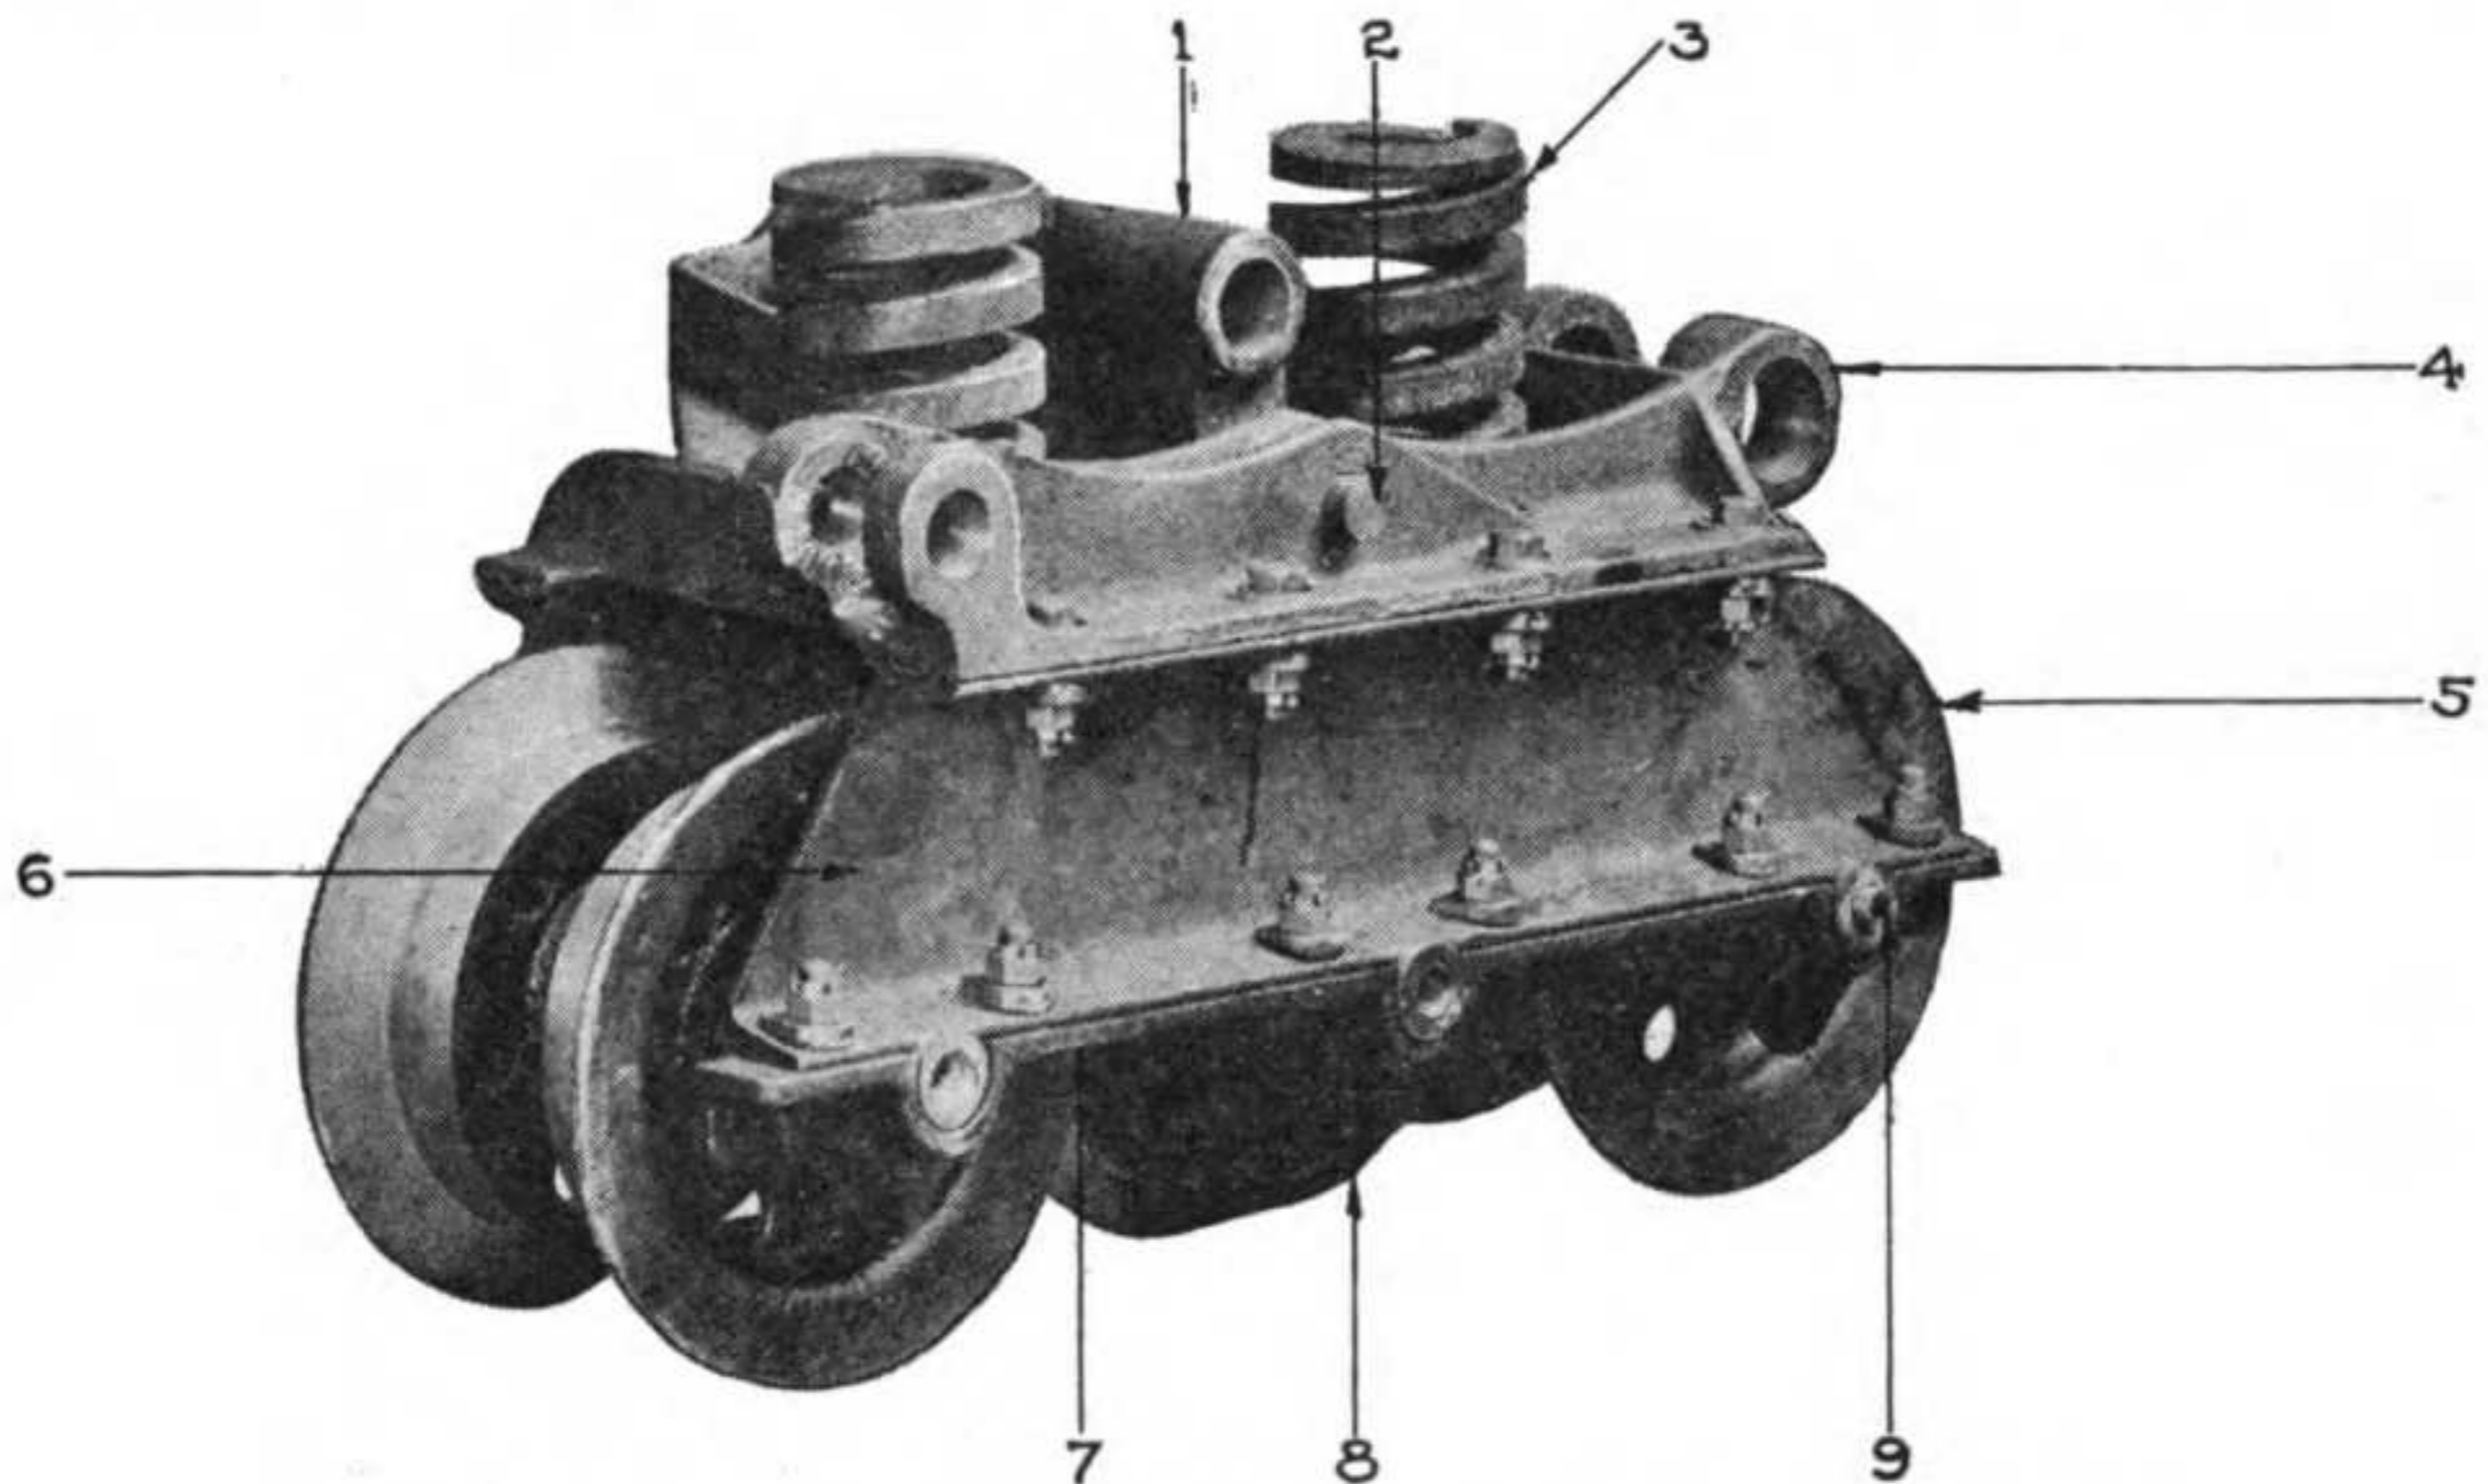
REAR ROLLER FRAME ASSEMBLY
